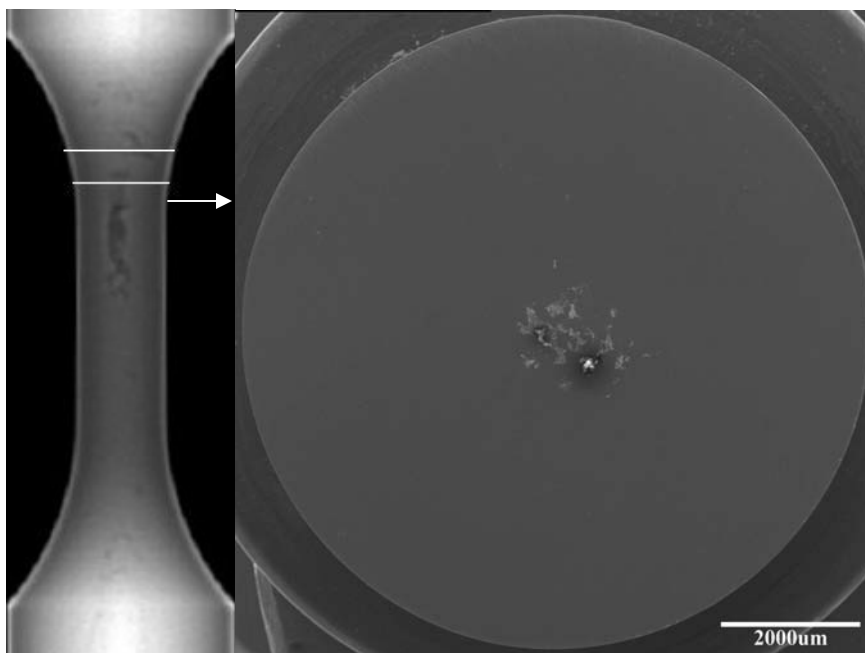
Radiograph with Indicated Fracture Zone and a Macroscopic View of a Cylinder with 5 mm Disc Specimen with the Fracture Surface Ground Back (Specimen C6)
